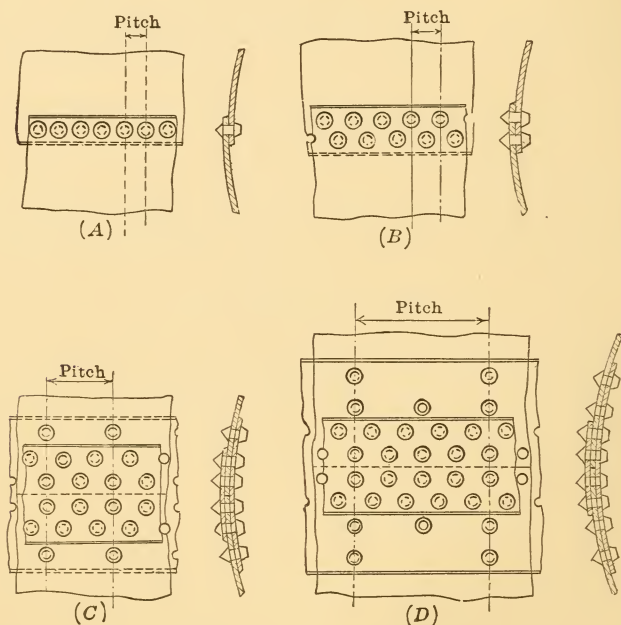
Types of riveted joints. (A) Single-riveted lap joint; one rivet in single shear. (B) Double-riveted lap joint; two rivets in single shear. (C) Triple-riveted, double butt-strapped joint; four rivets in double shear, one rivet in single shear. (D) Quadruple-riveted, double butt-strapped joint; eight rivets in double shear, three in single shear.
